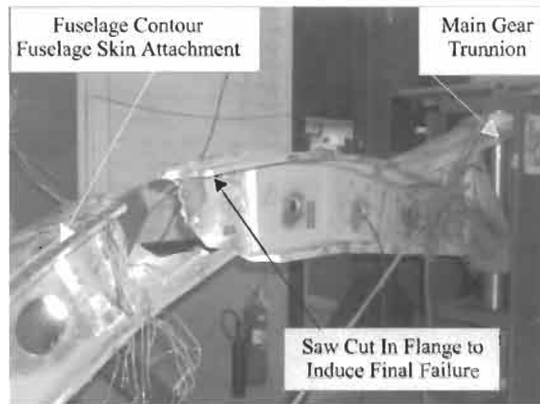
C-141 fuselage main gear frame, as shown in the test fixture, after failure in the patch region after cutting of the top flange.
